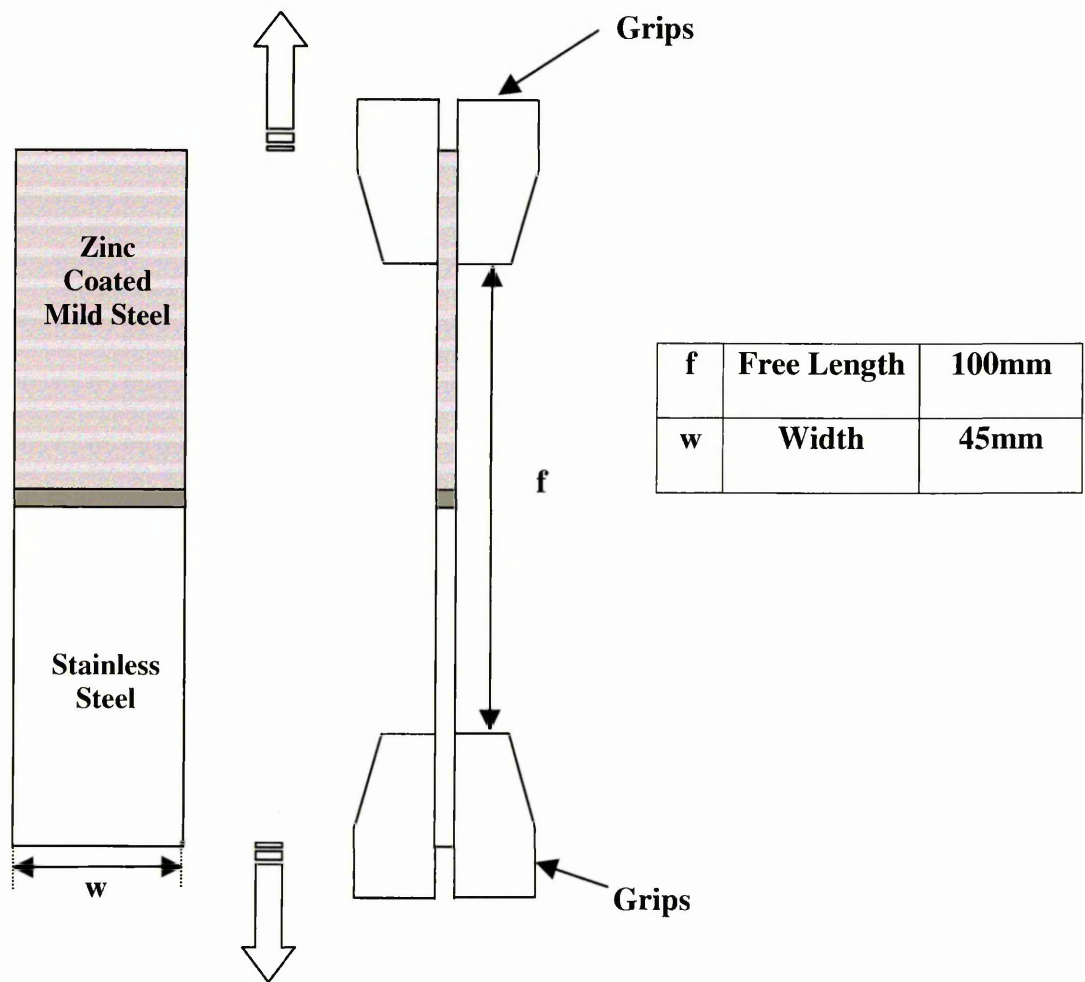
Schematic diagram showing the butt joint fatigue test dimensions
